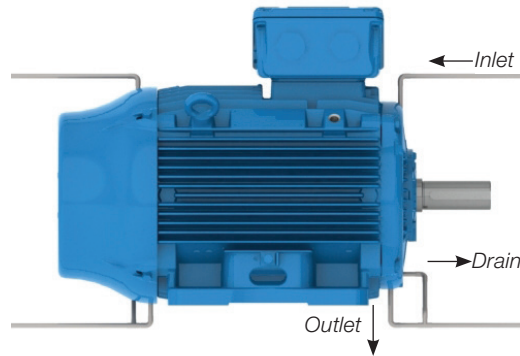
Oil supply and drain system of oil lubricated or oil mist lubricated motors
